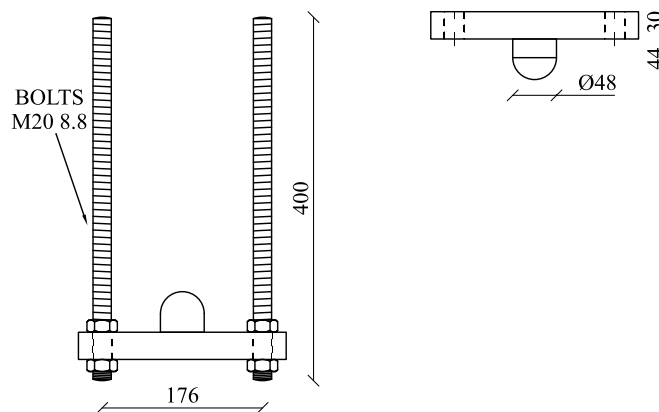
Views of the loading plates (detail D2) for the tension (left) and compression (right) tests.
